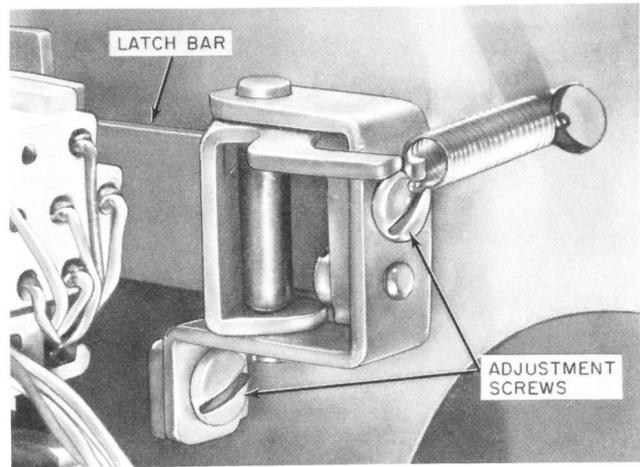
Latch Assembly for Key Modules of Attendant Console
